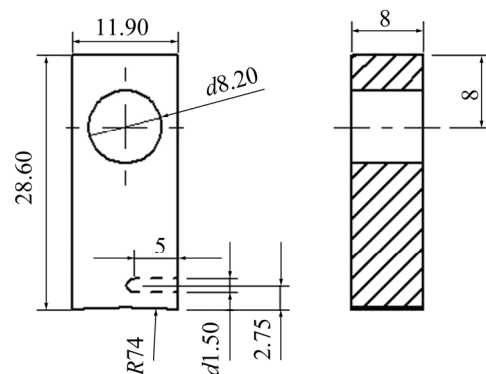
Technical drawing of wear test sample (Unit: mm)
